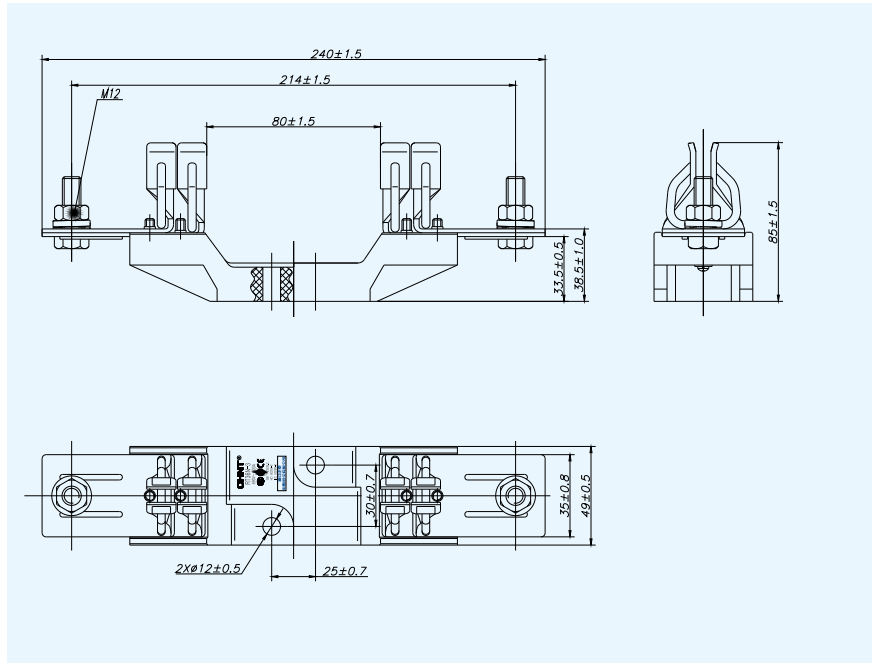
Overall dimensions of R T 3 6 N - 3 base
